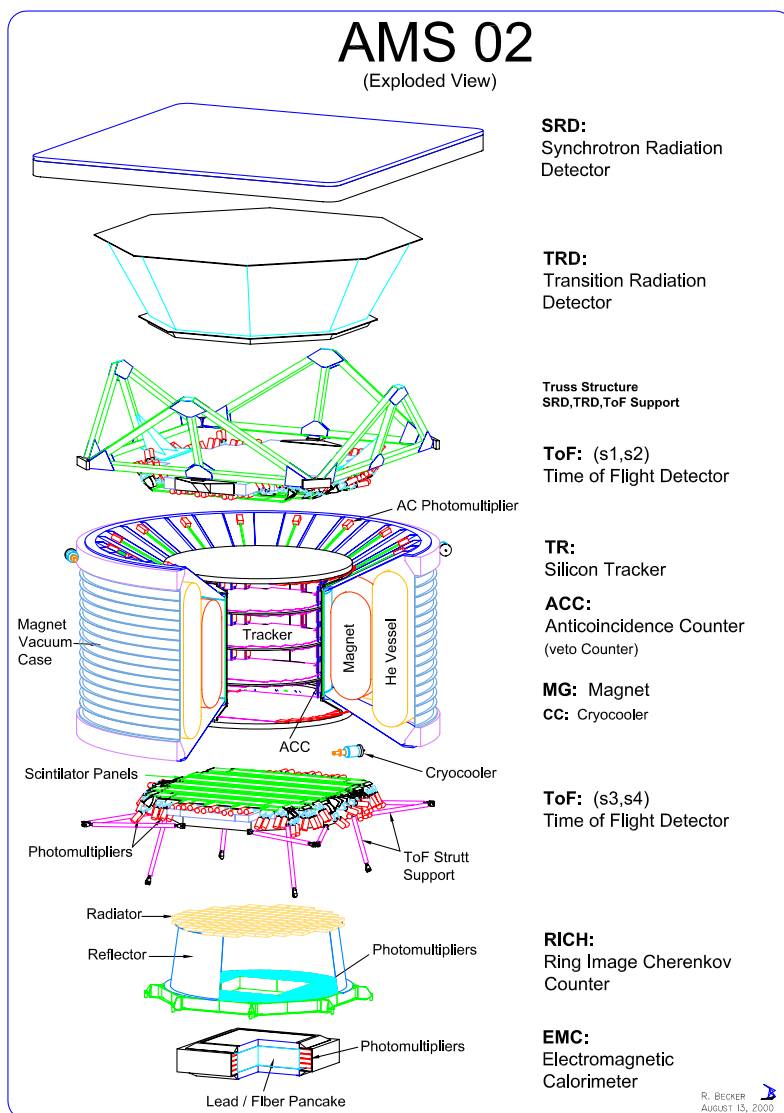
Exploded view of the AMS-02 detector layout identifying its major components.
